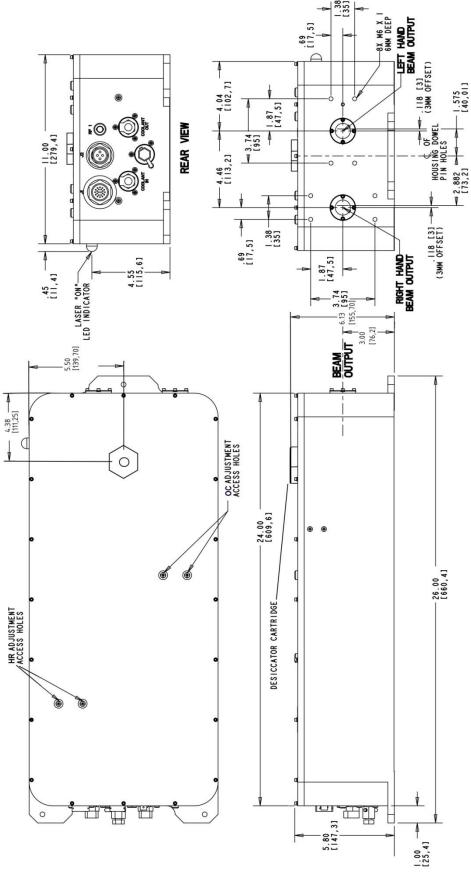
Patara Laser Head Dimensions, Sheet 1
